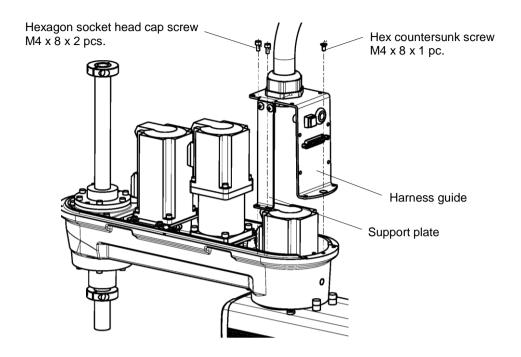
Mounting harness guide and support plate (KHL-500, KHL-600, KHL-700)
